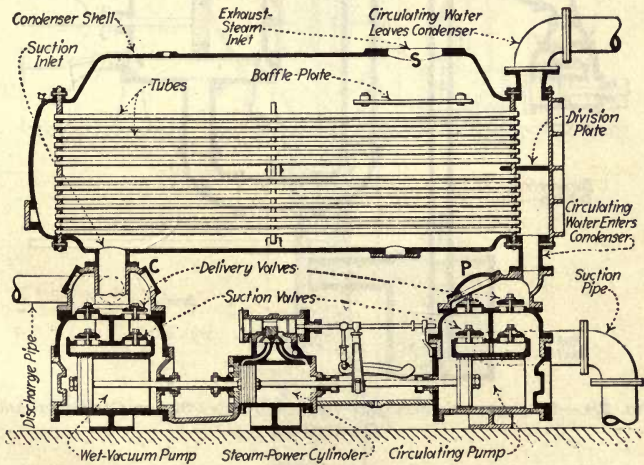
Typical Surface Condenser With Combined Circulating And Wet-Vacuum Pumps Of Reciprocating Type.
